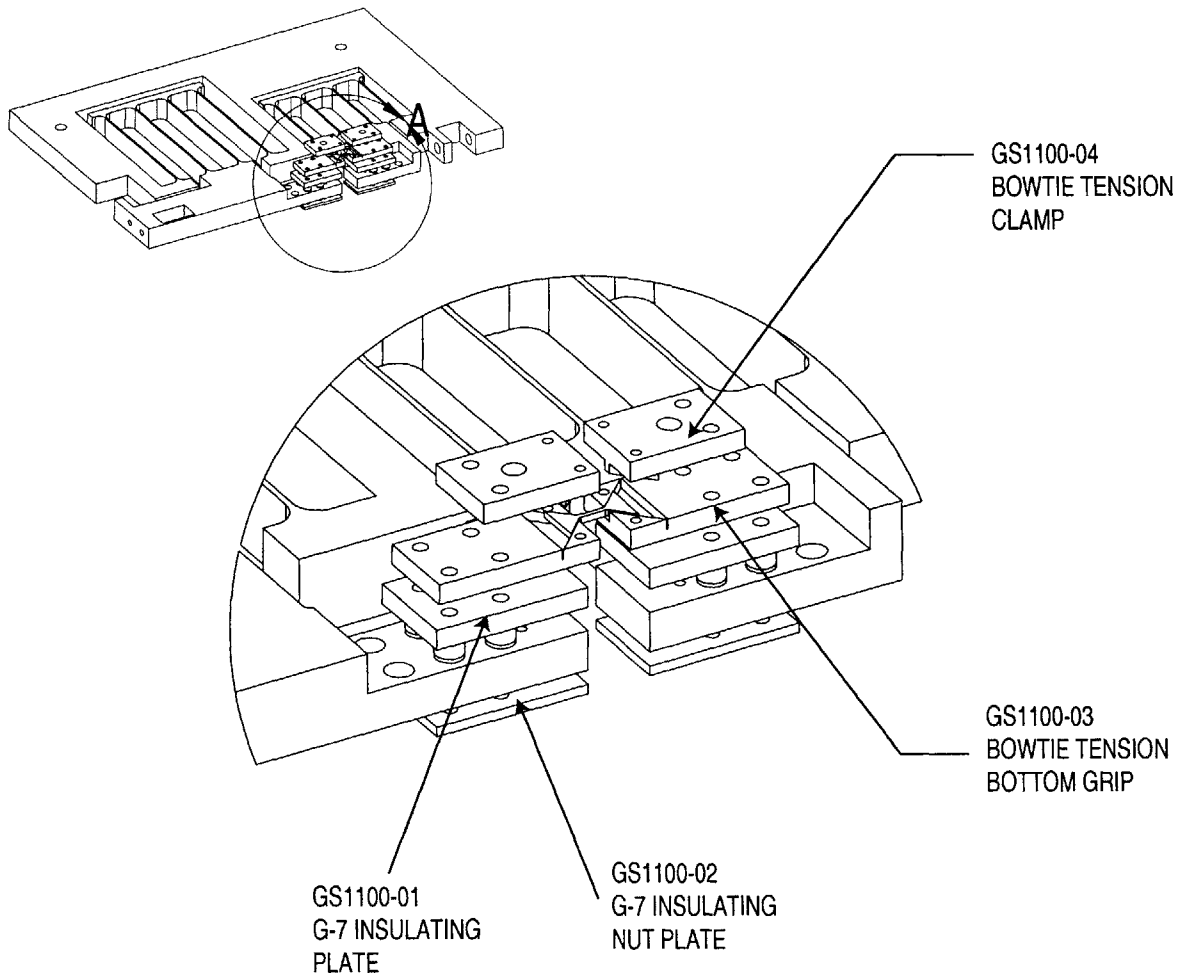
Insulating tension grips on high load testing machine (cut away view). The insulating parts may be replaced by Part GS0601-02 and GS0601-03 when insulation is not required.
